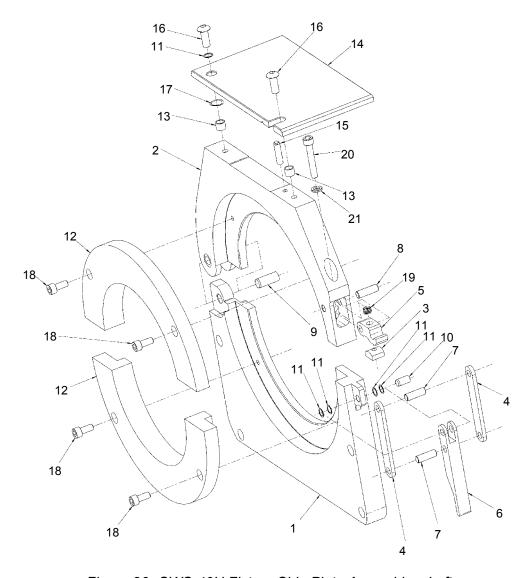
SWS-40H Fixture Side Plate Assembly – Left
